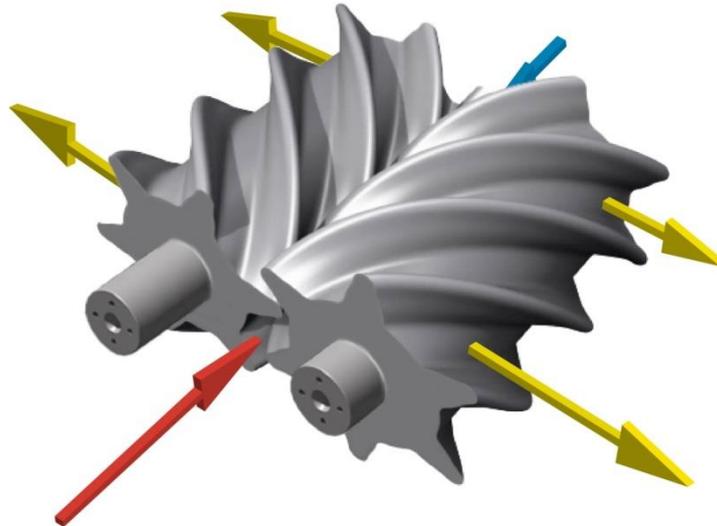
Axial and Radial Thrust Loads Imparted on Twin Screw Rotors
